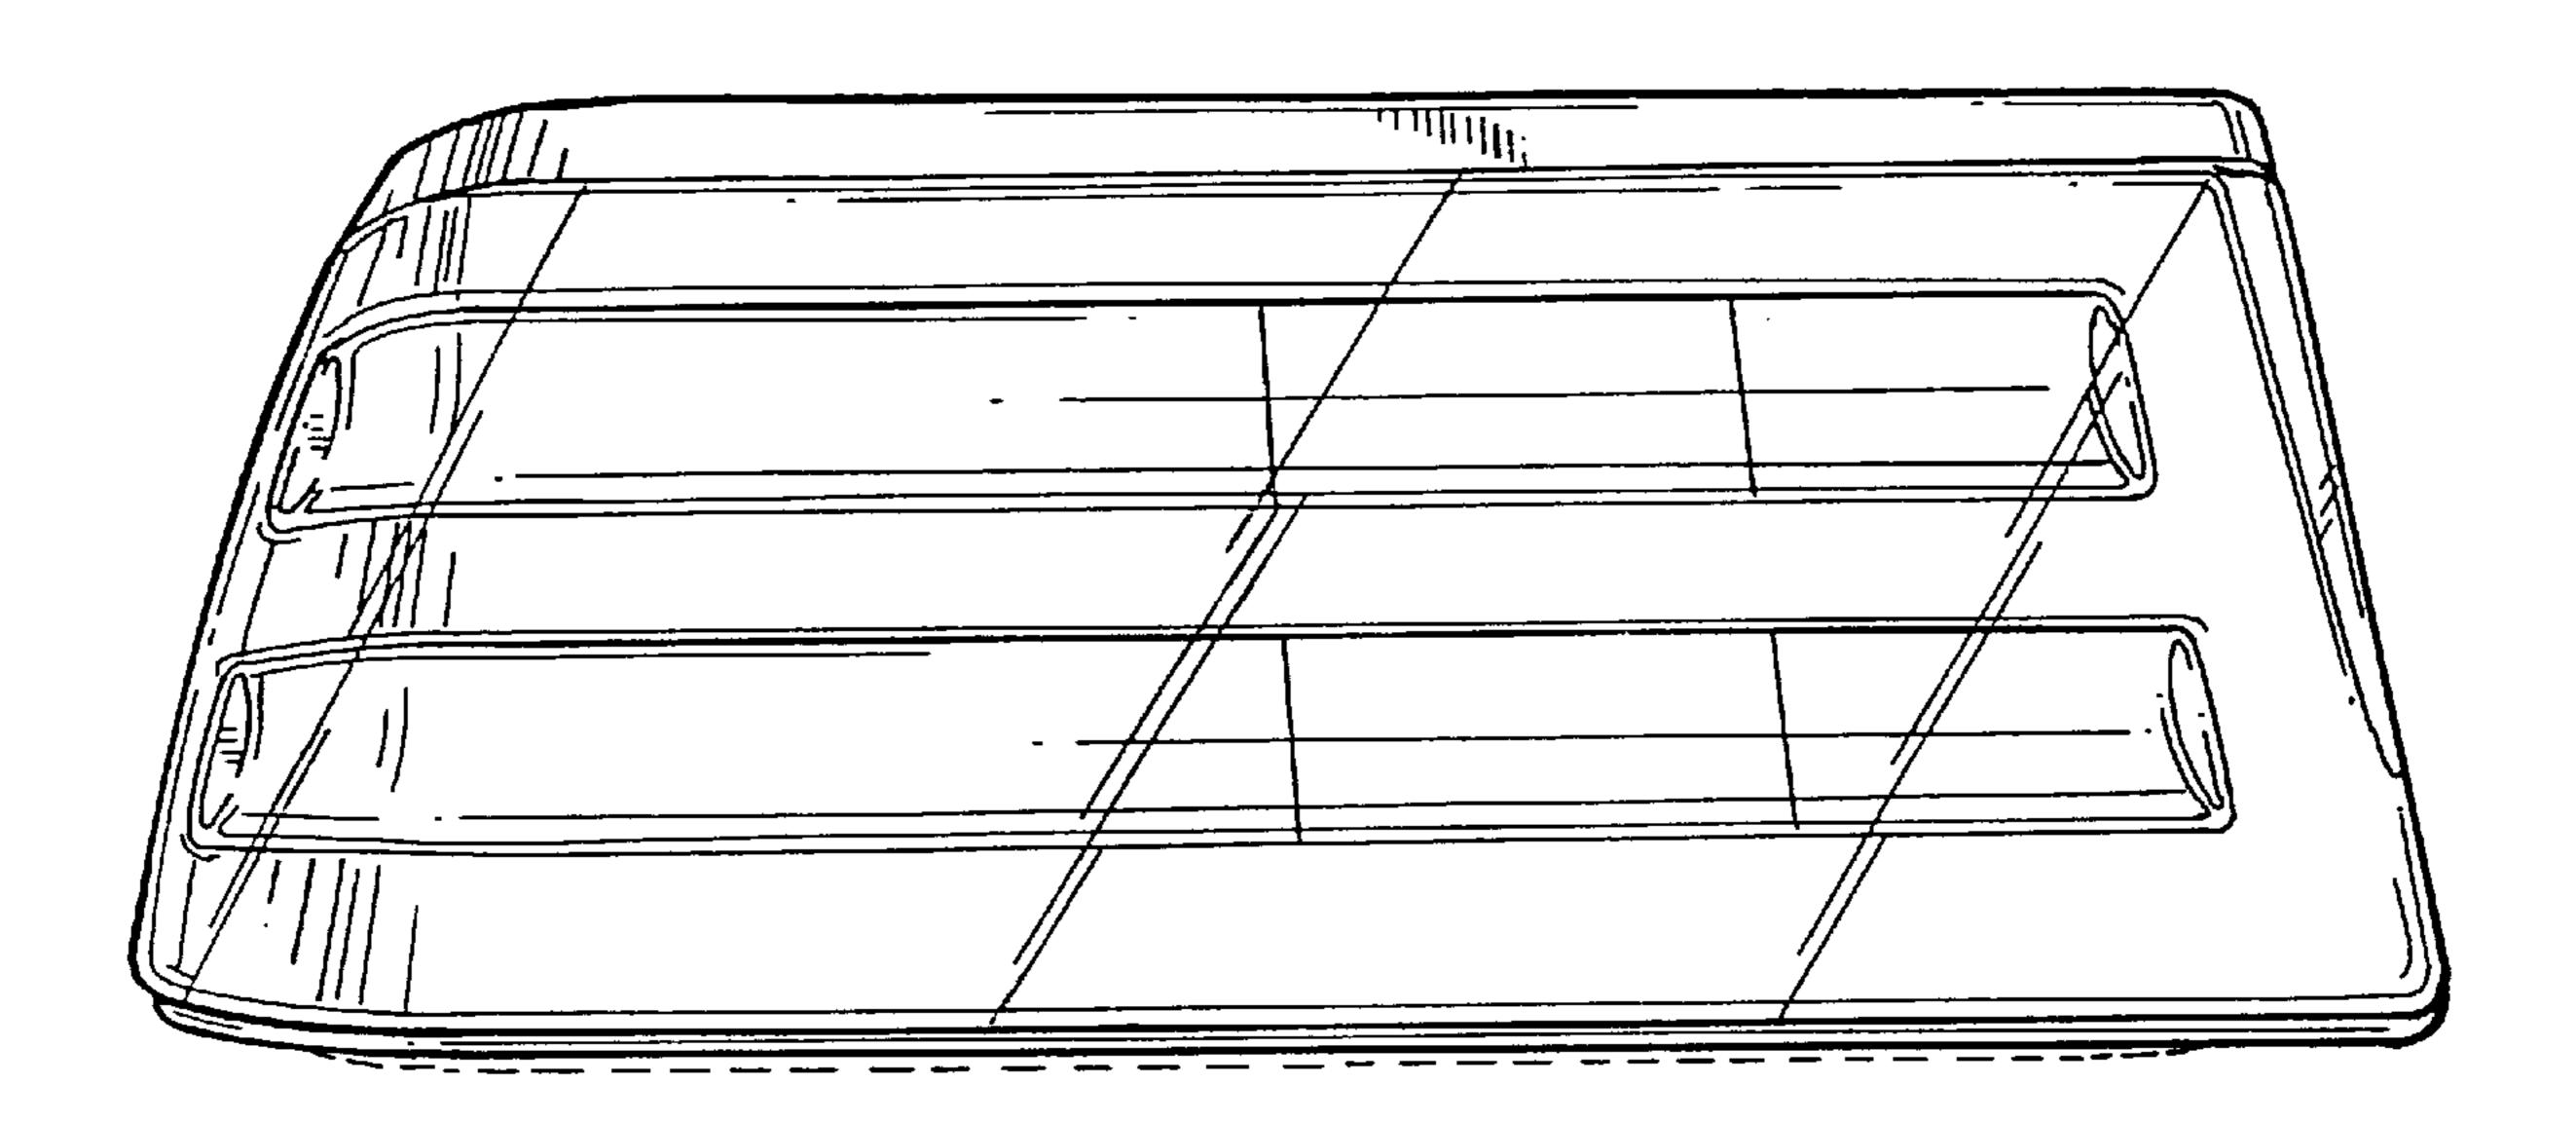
is a perspective view of the exterior surface configuration of a rear light cover for a motor vehicle showing a vehicle left hand side cover, according to my novel design; and,
